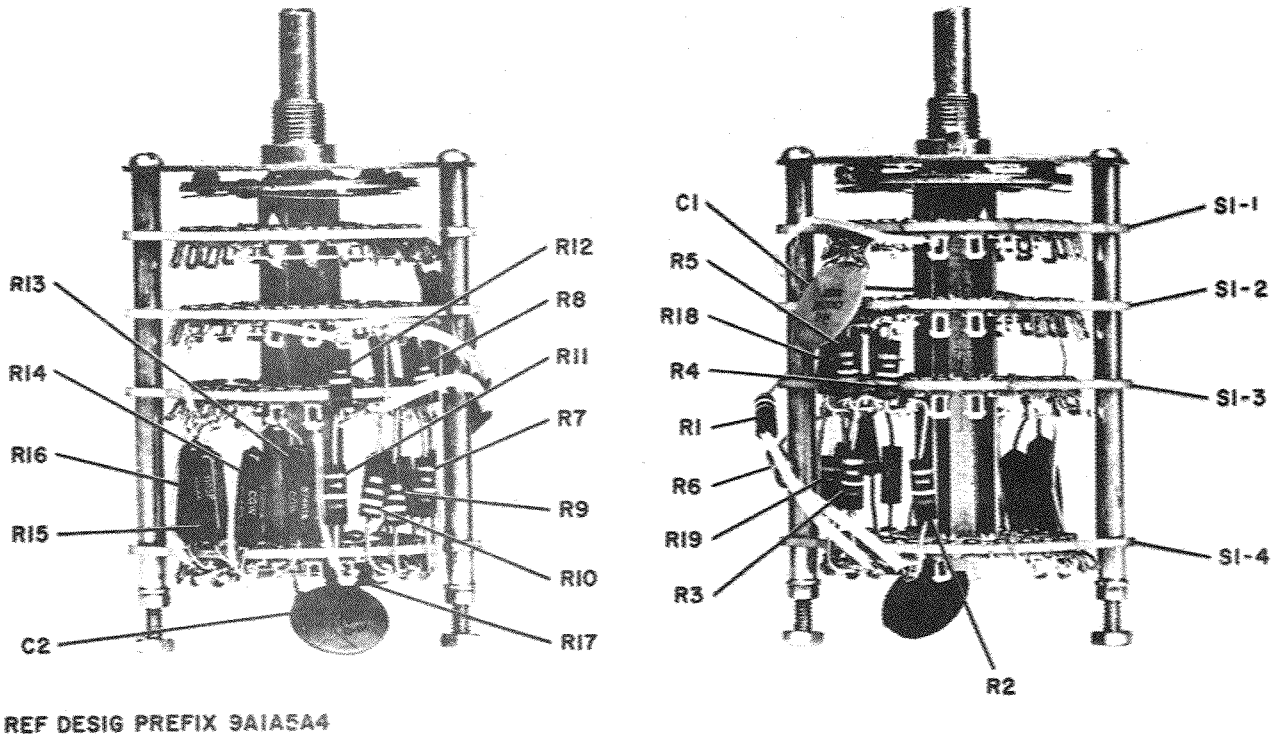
10 KW PA, Multimeter Switch Assembly 9A1A5A4, Component Locations
